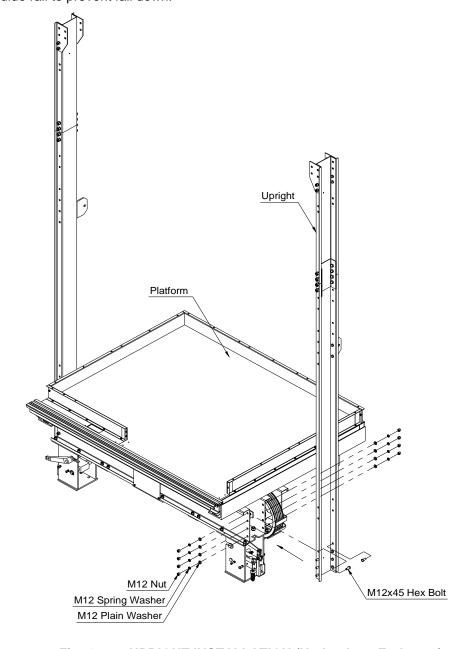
UPRIGHT INSTALLATION (Underslung Fork type)
